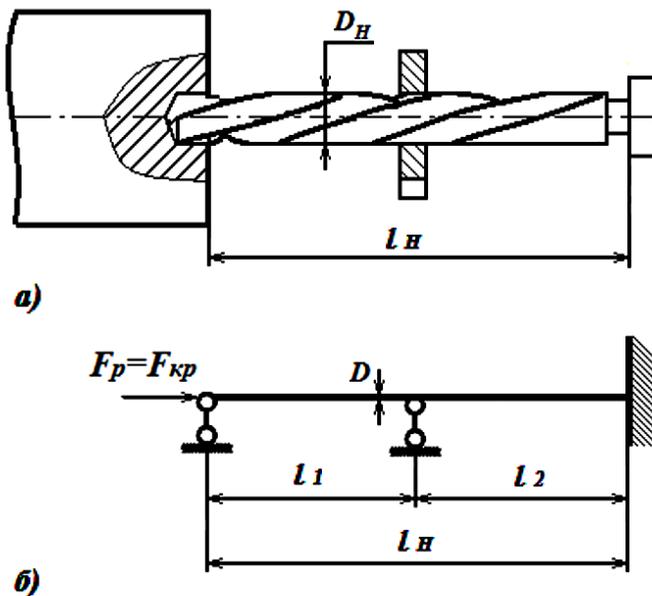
Structural design for deep-hole drilling technology using a drill steel guide.
